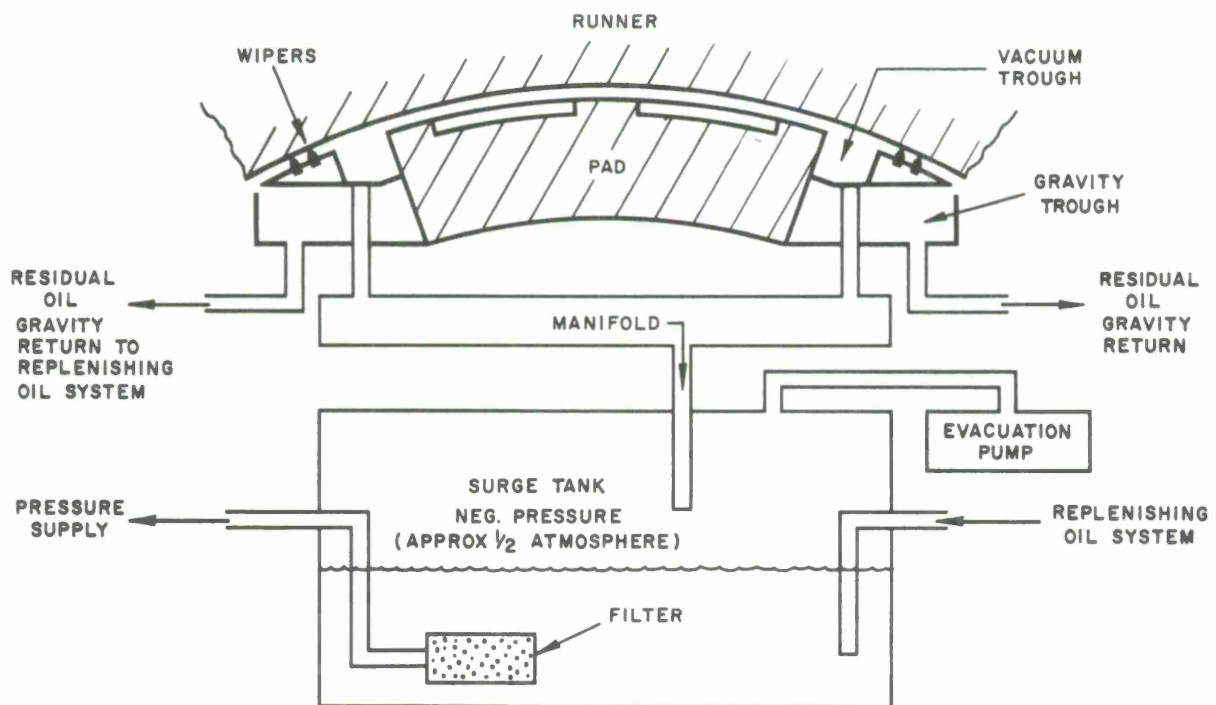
Typical elevation-pad schematic - a proposed oil-return system.
